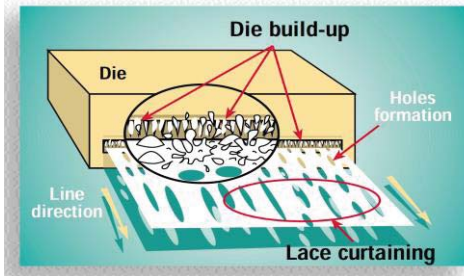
Schematic of die build-up causing lacing hole defects in an HDPE geomembrane
